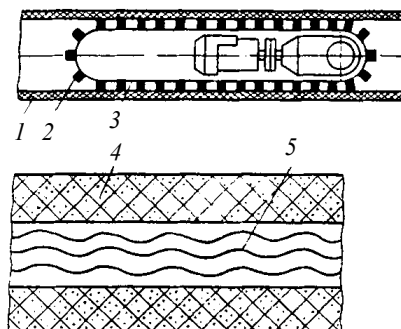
Magneto frictional drive scheme: 1 – magnetic belt; 2 – magnetic blocks; 3 – tractive chain or belt; 4 – magnetic belt filler; 5 – side irons
